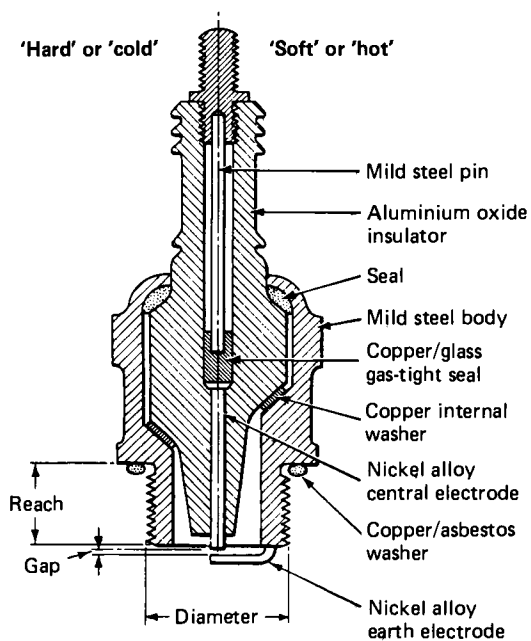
Sectional views of a 'cold' spark plug (left) and a 'hot' plug (right)
